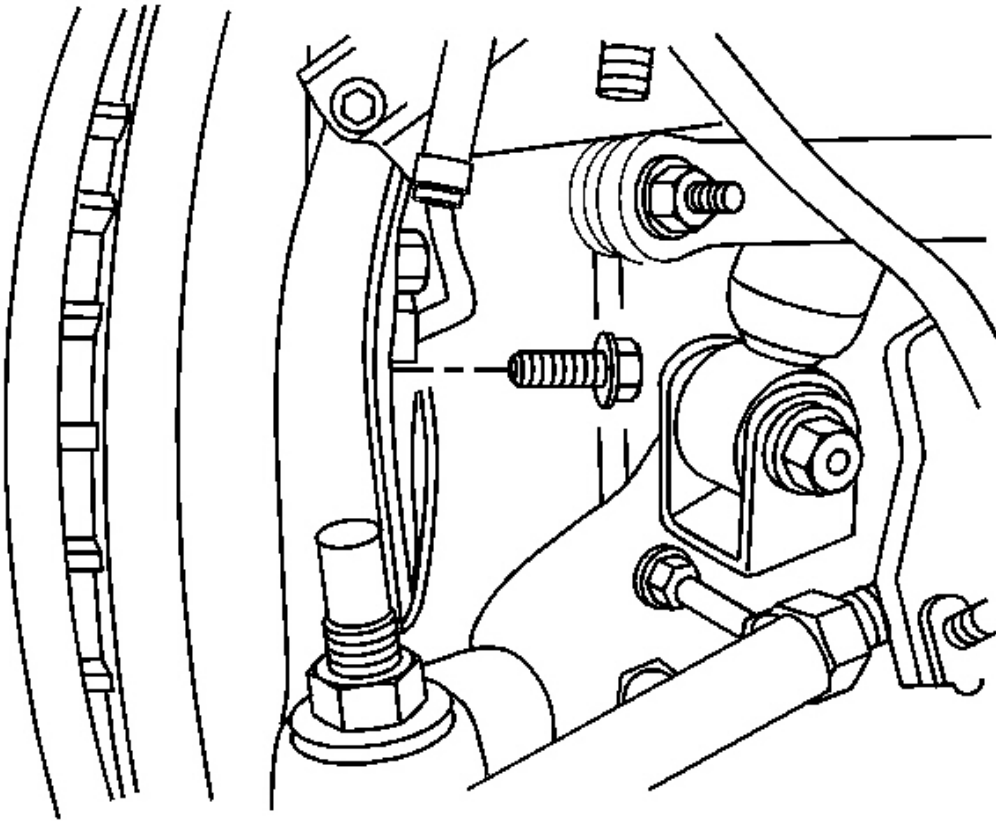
View Of Wheel Bearing/Hub Mounting Bolts, Brake Rotor Assembly
